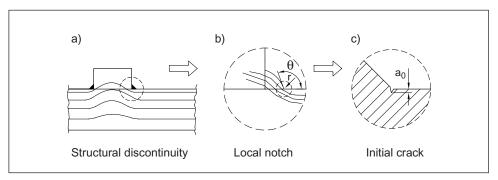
Different types of discontinuities in a welded structure and typical place of an initial crack [2]
